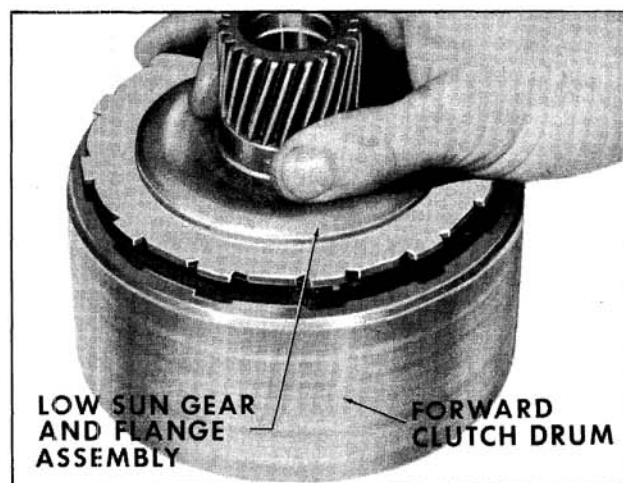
Removing Low Sun Gear and Flange Assembly
